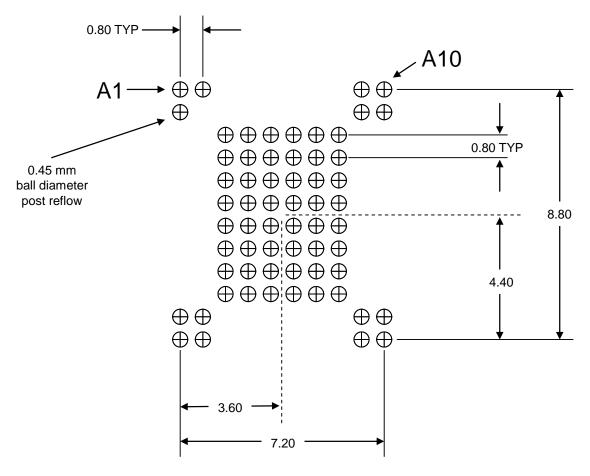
BGA-63 ball spacing requirements (top view, dimensions in millimeters)
